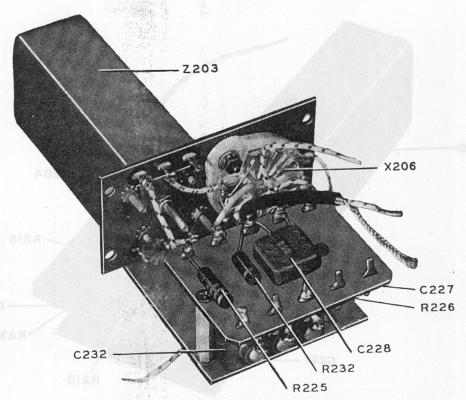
Receiver I-F Amp. Detector Assembly—Bottom View
